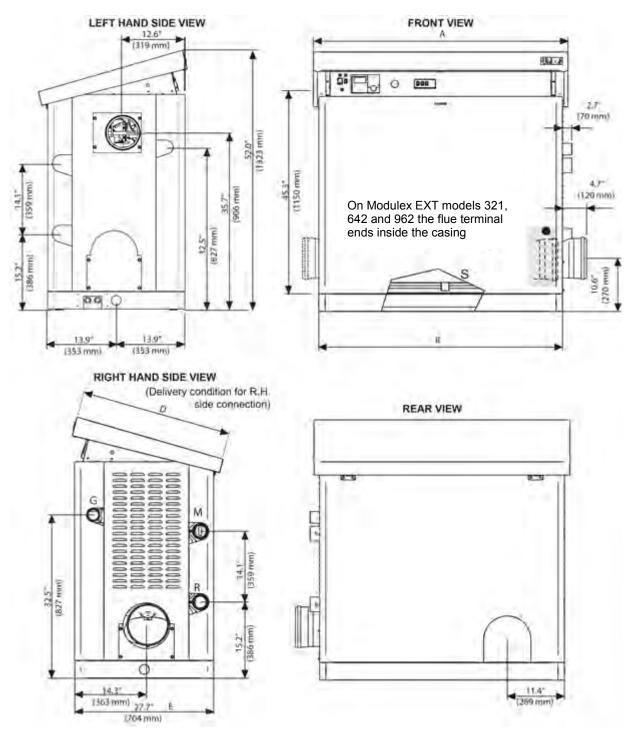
MODULEX EXT Dimensional Drawings (Side Views)
